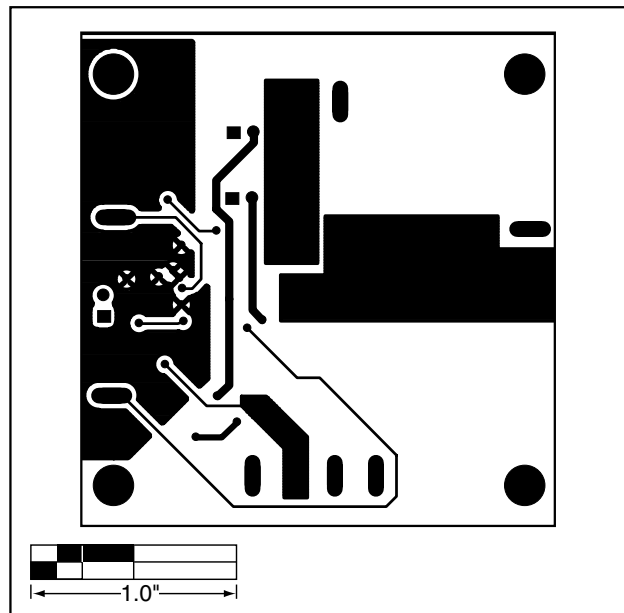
MAX1747 EV Kit PC Board Layout—Solder Side
